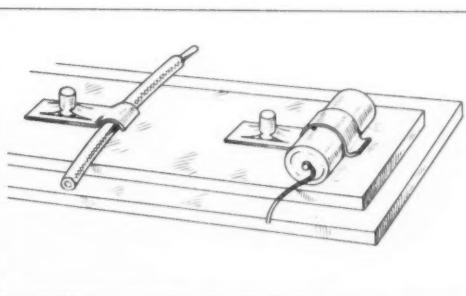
"Speed Nut" Straps Used to Support Small Cylindrical Parts
